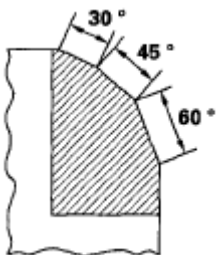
Identifying Bevel Upper Edge Of Seat Angle
